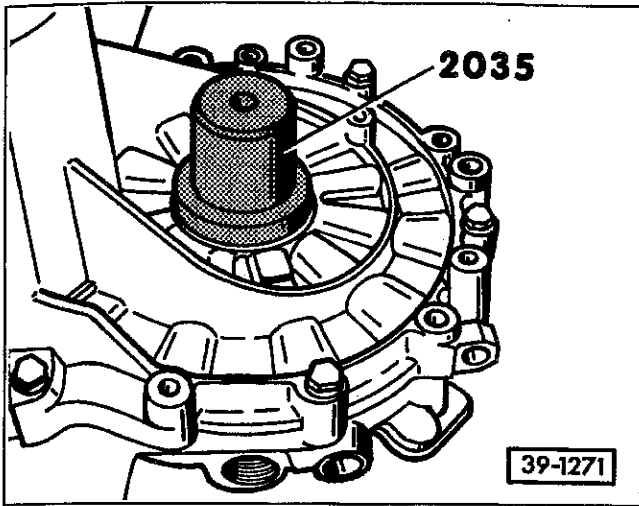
Drive flange oil seal being installed Volkswagen special tool no. VW 2035.
